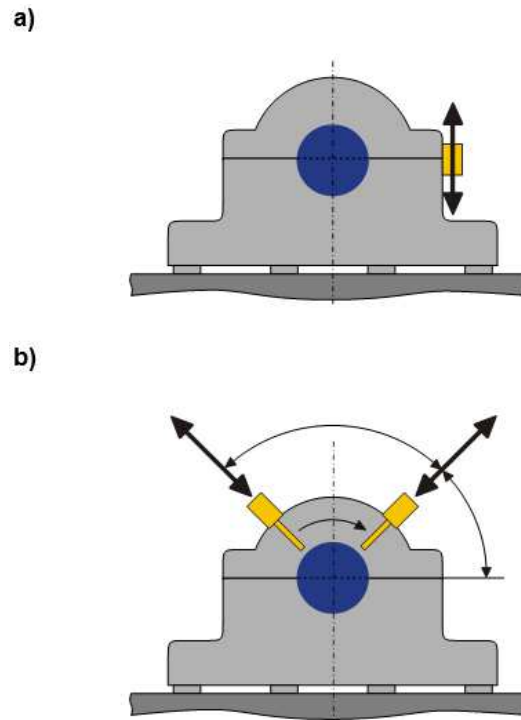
Vibration measurement of bearing pedestals (a) and turbine shaft (b).
